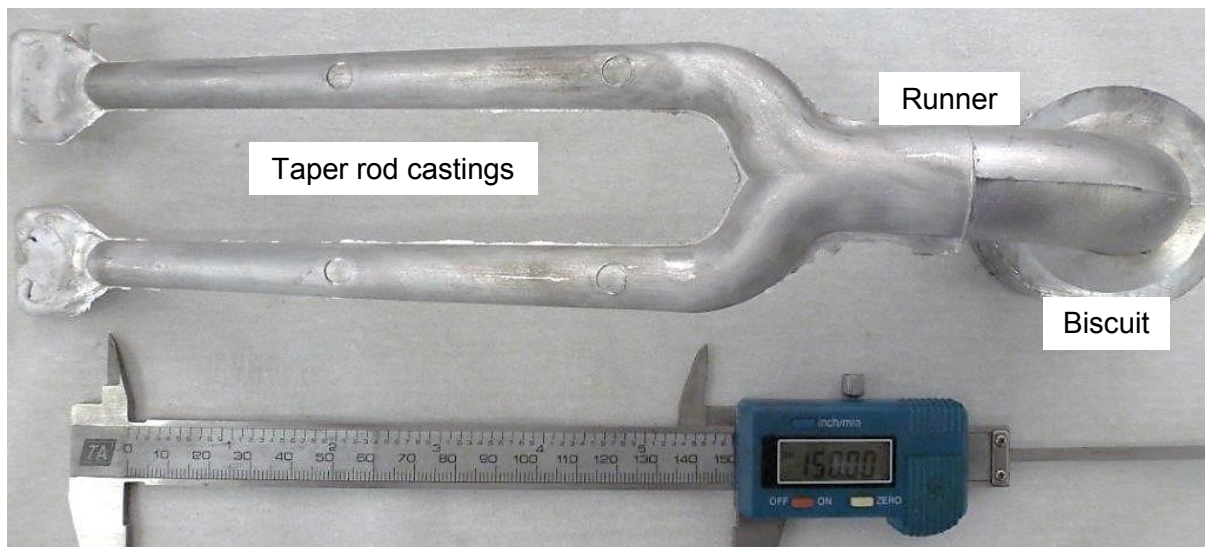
Alloy 7A as an example of the taper rod casting with runner and biscuit.
